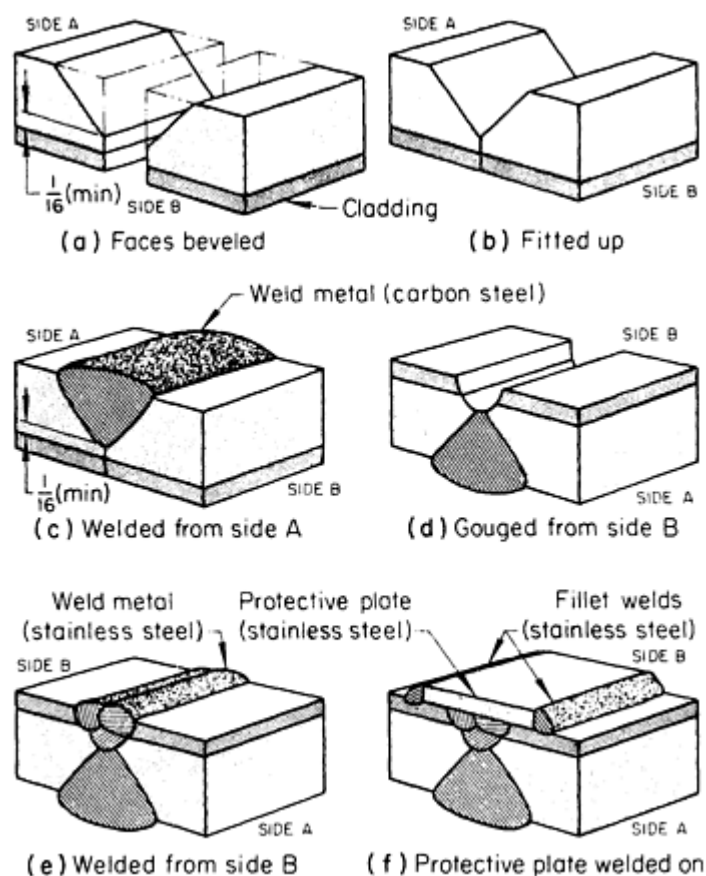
PROCEDURE FOR WELDING STAINLESS-CLAD CARBON AND LOW-ALLOY STEEL, USING STAINLESS STEEL FILLER METAL ONLY IN PORTION OF JOINT FROM WHICH CLADDING WAS REMOVED. (A) AND (B) THE CLAD PLATES ARE MACHINED FOR A TIGHT FIT-UP, WITH THE BOTTOM OF THE WELD GROOVE NOT LESS THAN 1.6 MM ($\frac{1}{16}$ IN.) ABOVE THE STAINLESS STEEL CLADDING. (C) CARBON STEEL FILLER METAL IS DEPOSITED FROM SIDE A (A LOW-HYDROGEN FILLER METAL IS USED FOR THE FIRST PASS), TAKING CARE NOT TO PENETRATE CLOSER THAN 1.6 MM ($\frac{1}{16}$ IN.) TO THE CLADDING. (D) STAINLESS STEEL CLADDING ON SIDE B IS BACKGOUGED UNTIL SOUND CARBON STEEL WELD METAL IS REACHED. (E) THE BACKGOUGED GROOVE IS FILLED WITH STAINLESS STEEL WELD METAL IN A MINIMUM OF TWO LAYERS. (F) WHEN REQUIRED FOR SEVERELY CORROSIVE SERVICE, A PROTECTIVE STRIP OF STAINLESS STEEL PLATE MAY BE
